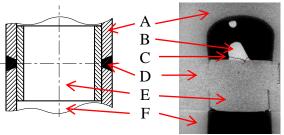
Welded wiring diagram A – pull-rod lower eye; B – spot welded seam; C – crack; D – welding seam; E – alignment ring; F – pull-rod tube
